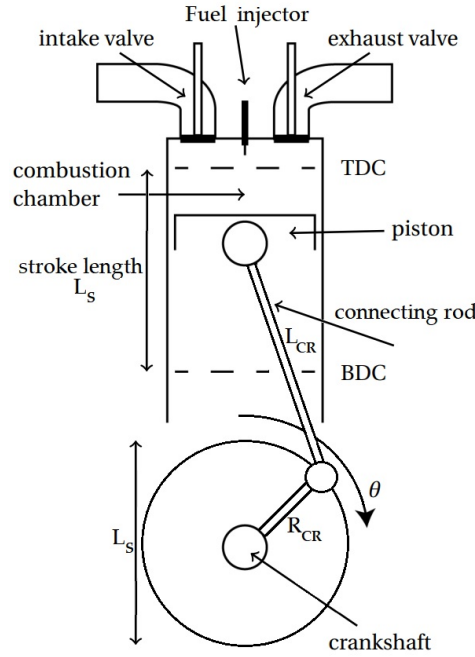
Schematic view of the geometry of cylinder, crank rod and crank shaft [4]
